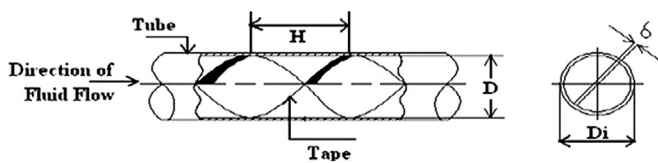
Full-length twisted tape inserted inside a tube [36].
